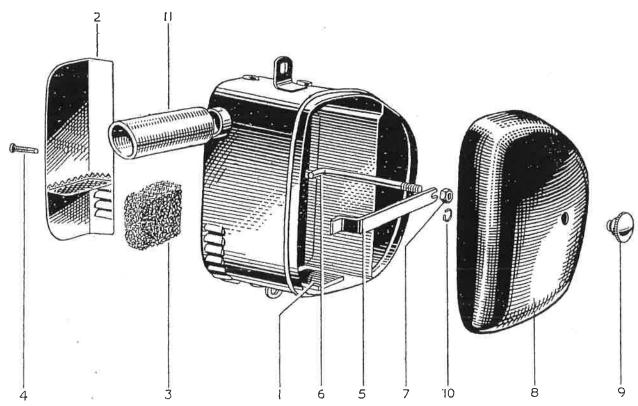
TOOLBOX, BATTERY CARRIER AND AIR CLEANER.
